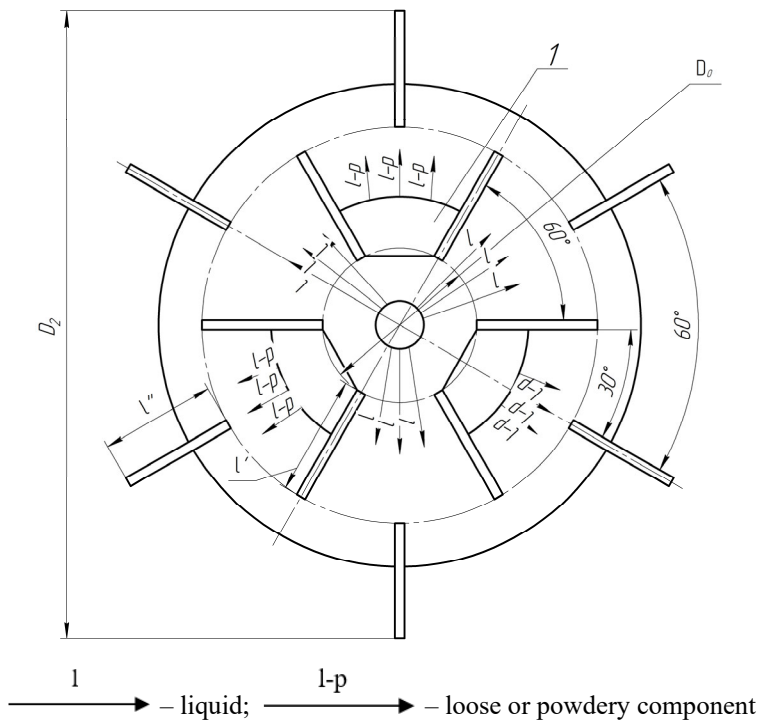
Diagram of the impeller of an installation for preparing mixtures.
